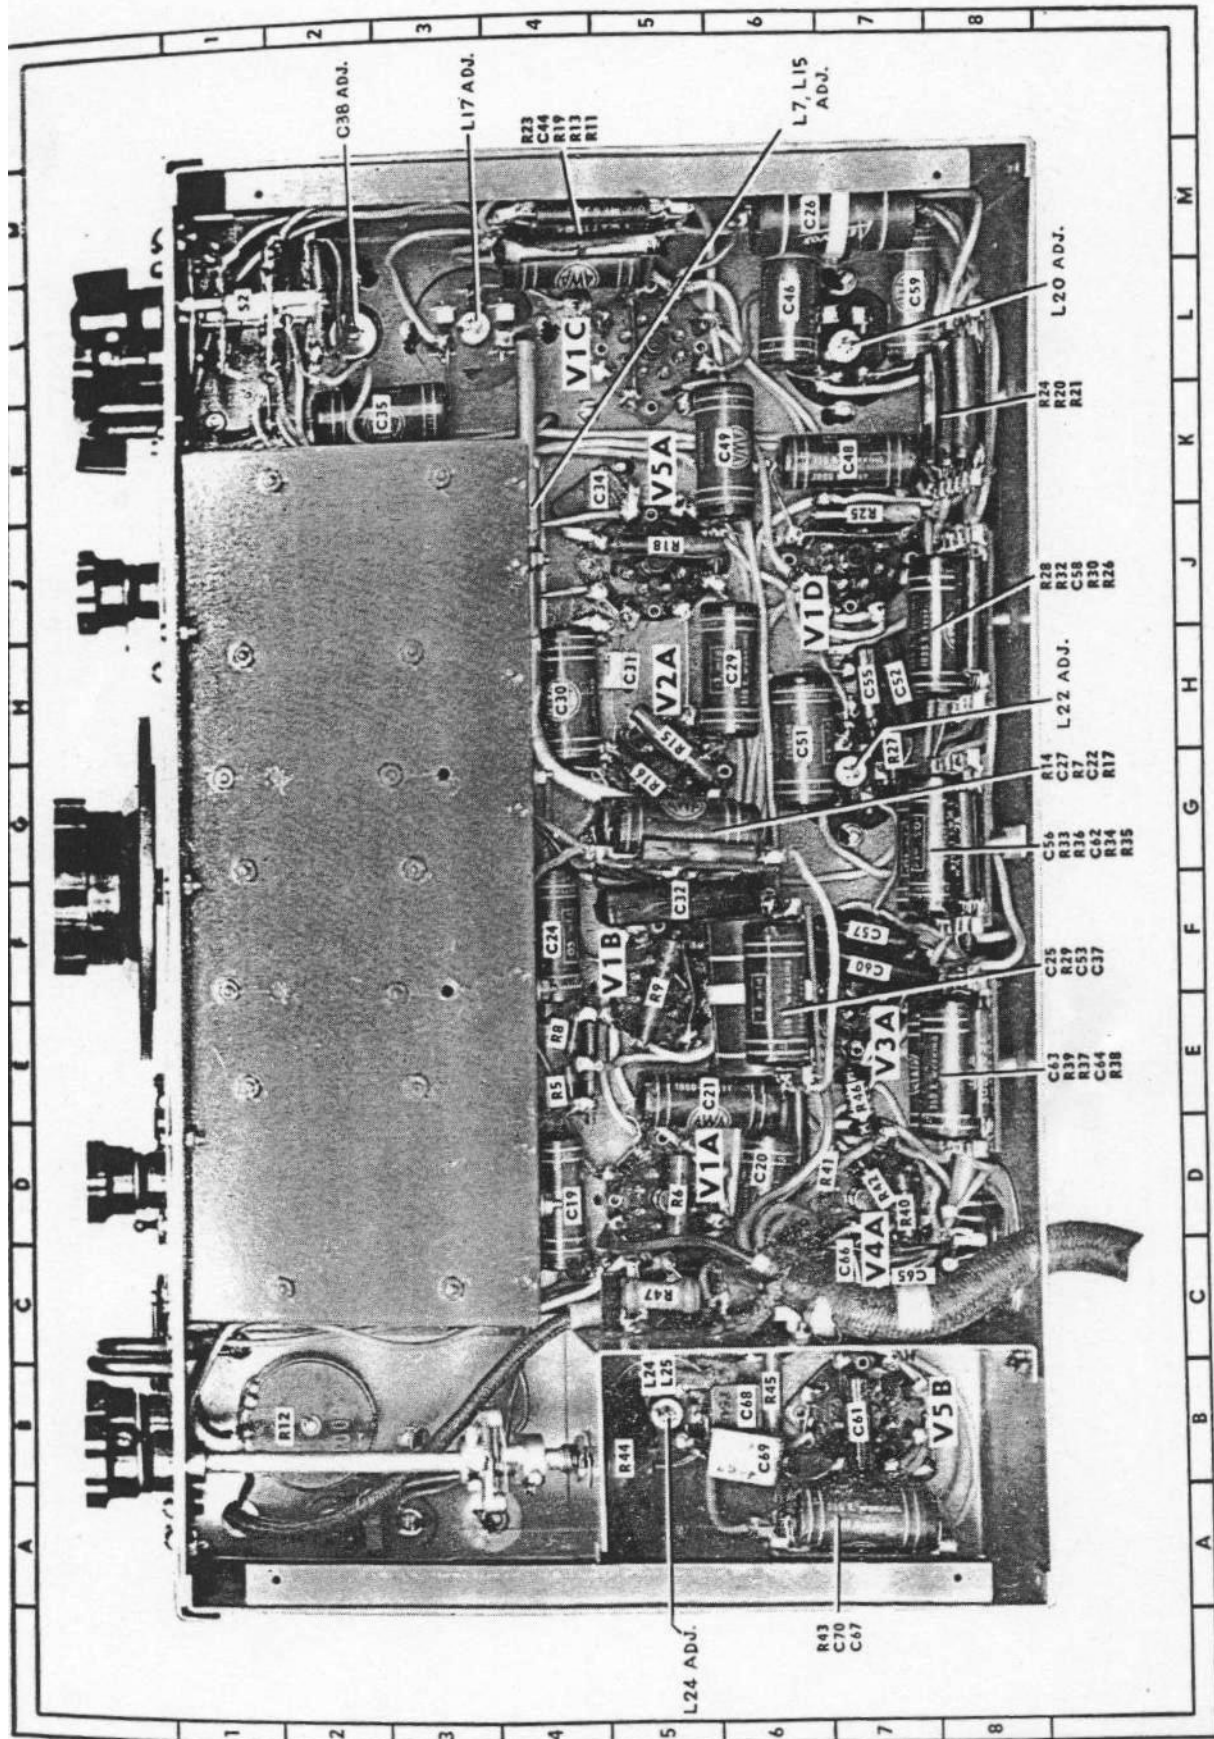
RECEIVER CHASSIS—UNDERNEATH VIEW.
